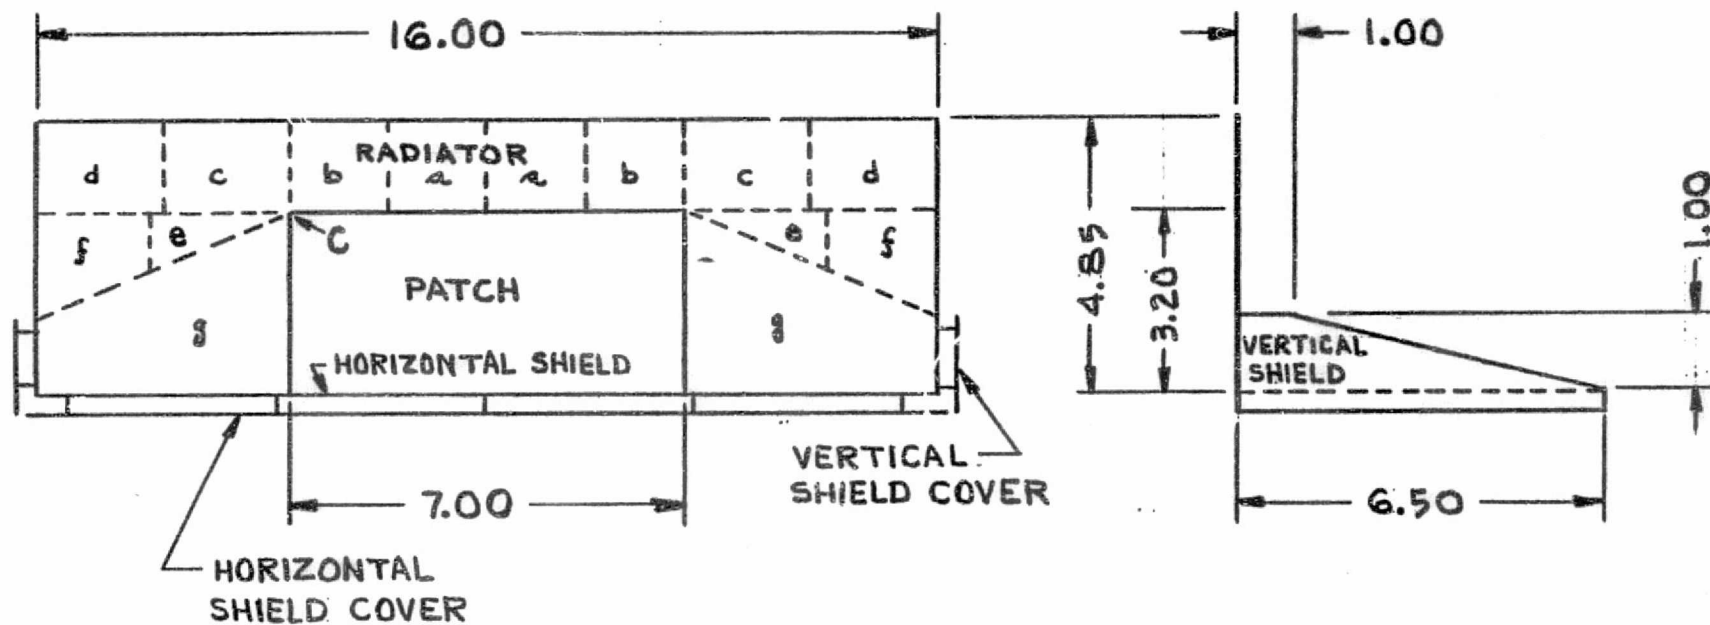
BASIC DESIGN OF RADIANT COOLER (DIMENSIONS IN INCHES)
